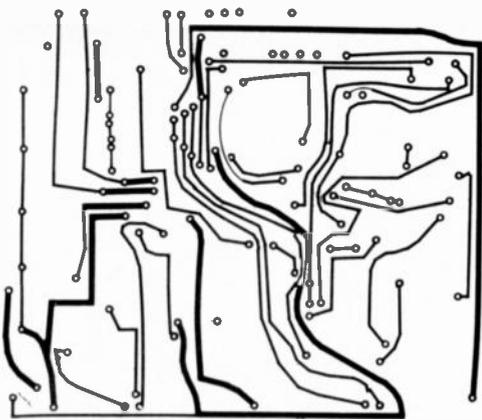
FOIL PATTERN of component-side of PC board. Actual board measures 5 x 4 1/4-inches.
